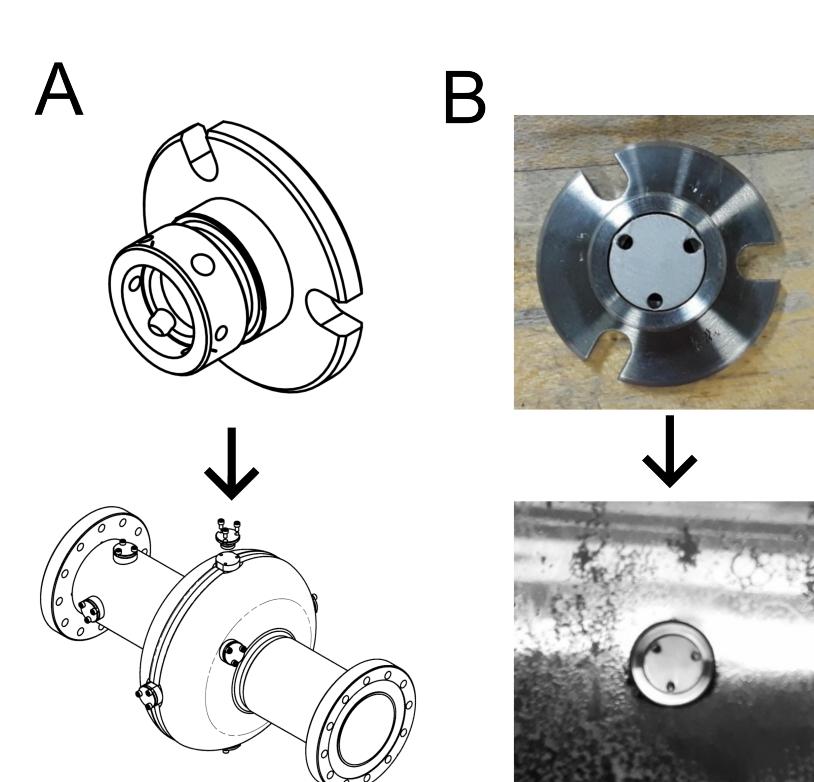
(A) A schematic of the coupon cavity and the sample holder used to polish the Nb<sub>3</sub>Sn coated samples. The sample holder can hold 1 cm diameter disks by clamping the sides of the sample with set screws. (B) Pictures of the sample holder sitting outside the coupon cavity and with a sample mounted as seen from the inside of the coupon cavity.
